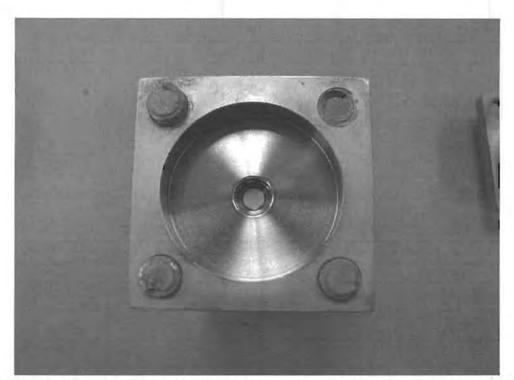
A closer view of the fracture faces on the screws. Screw # 1 is the upper left, screw # 2 is at the upper right, screw # 3 is at the lower right and screw # 4 is at the lower left in the photograph.
